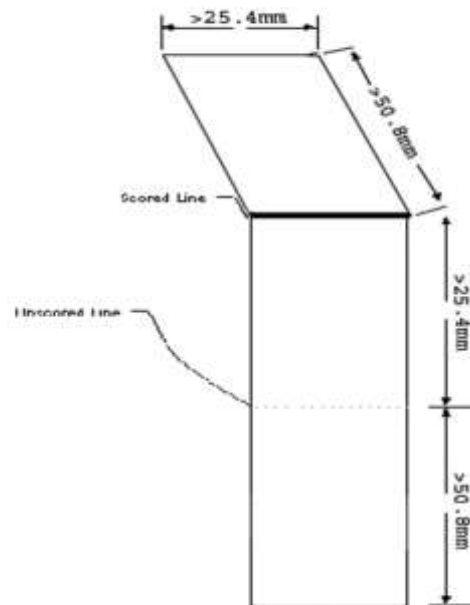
Test sample, indicating minimum dimensions for each part of the specimen.
